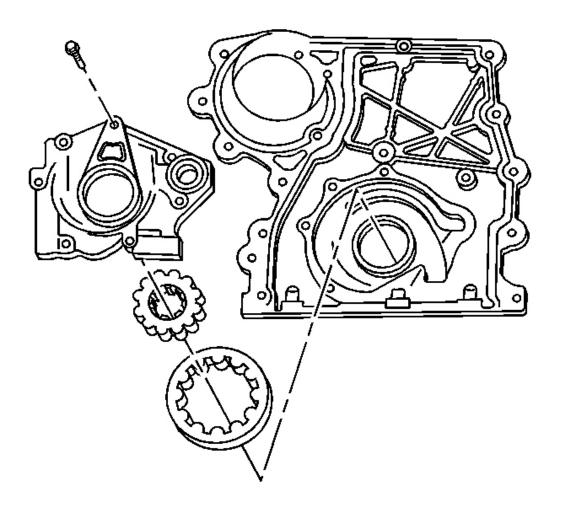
Exploded View Of Oil Pump Courtesy of GENERAL MOTORS CORP.
